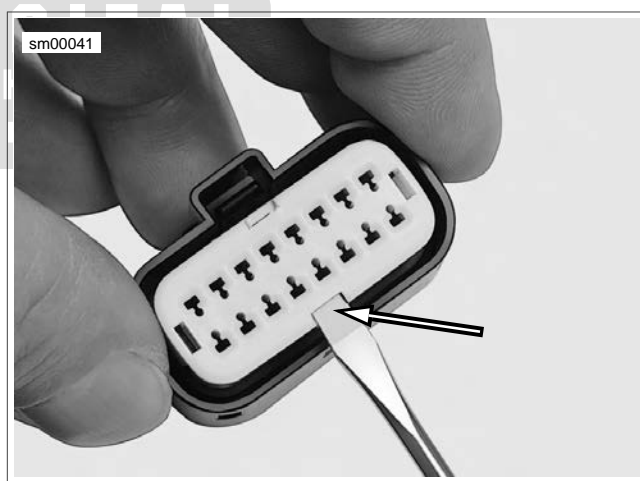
Molex Connector: Secondary Lock Pry Slot (Socket Housing)
